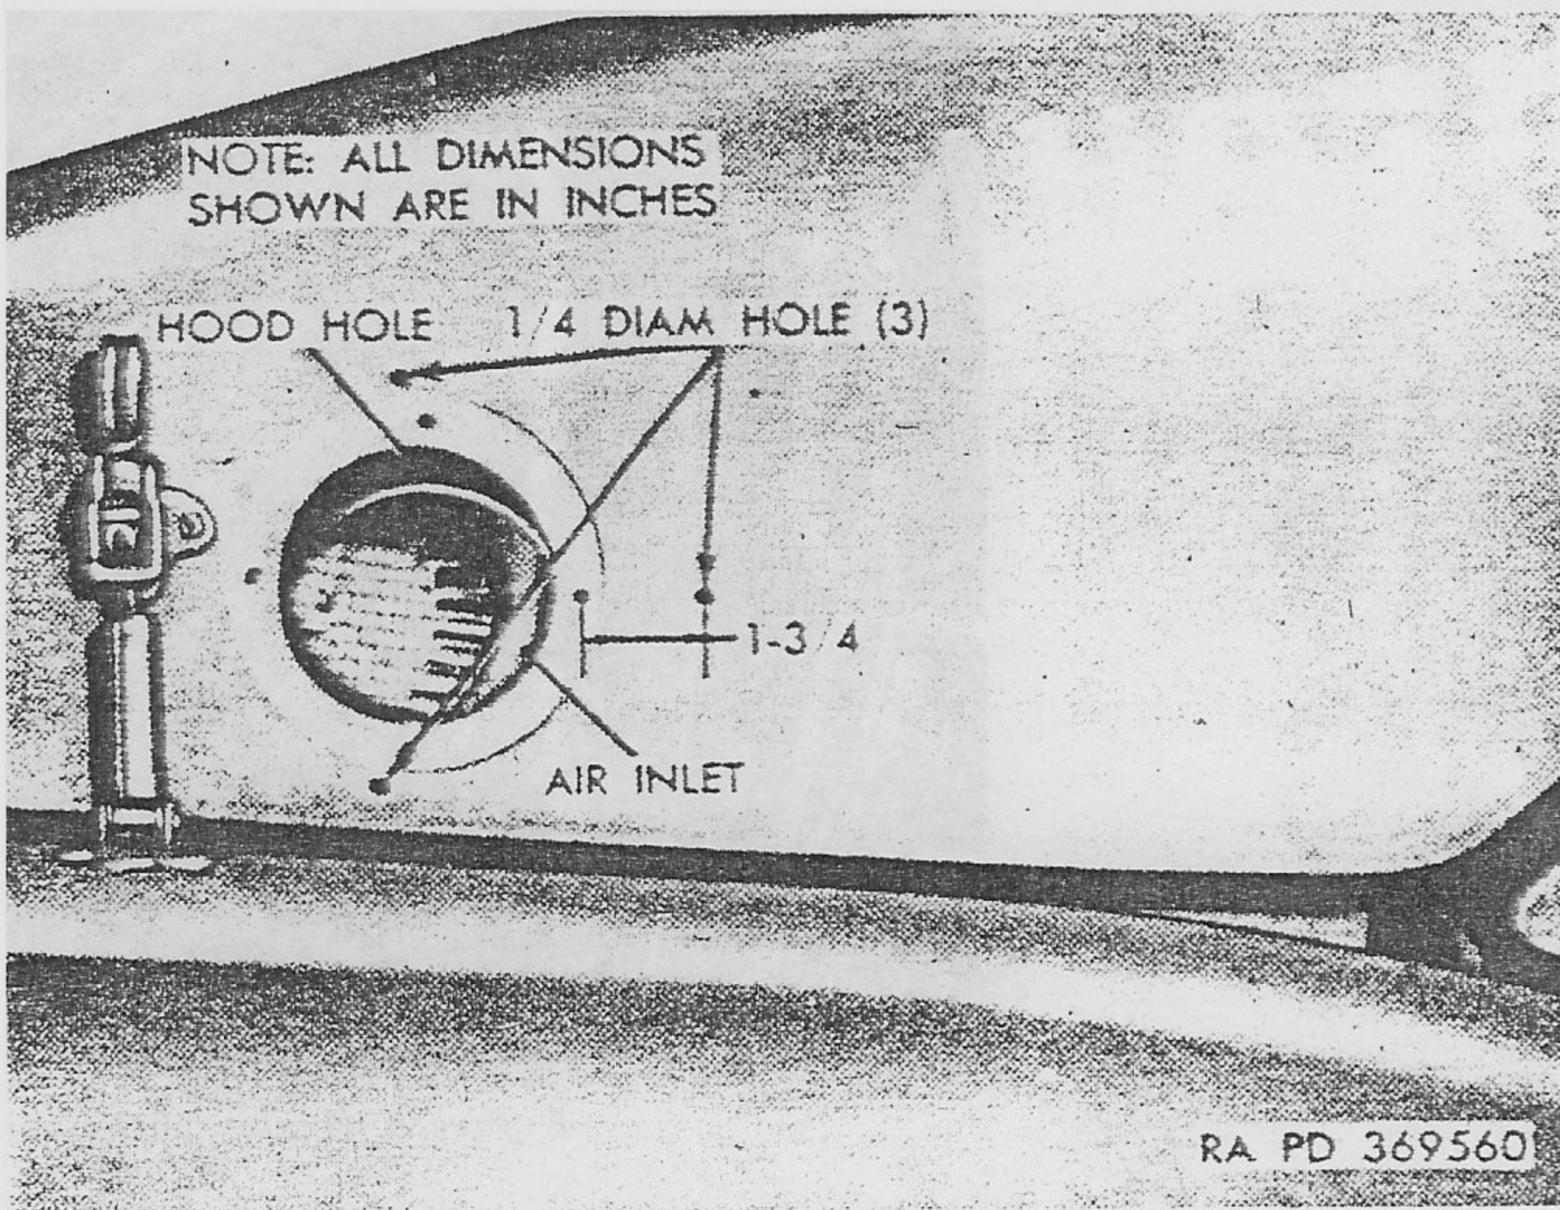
Hood heater cover removed and air scoop hood holes drilled.
